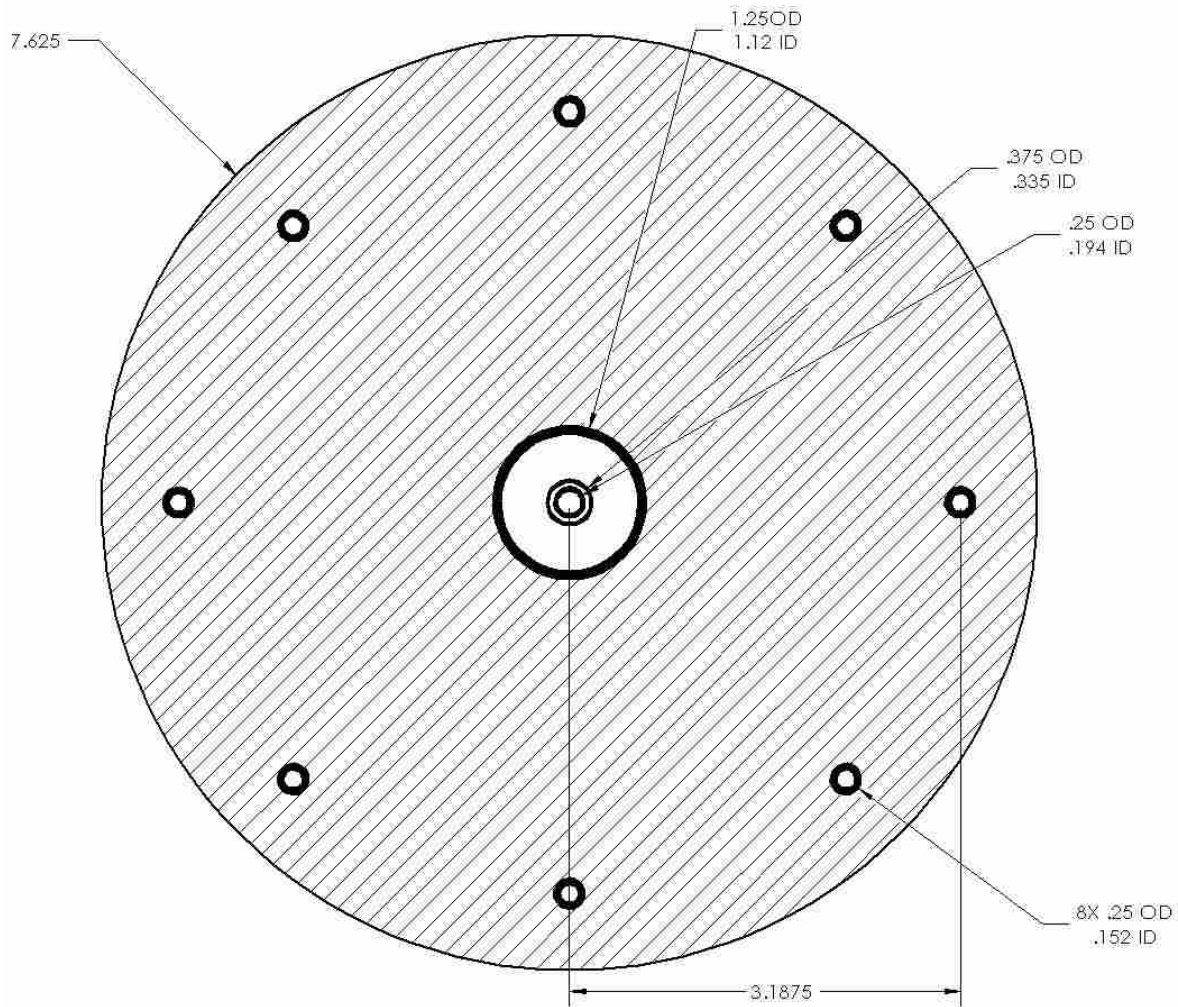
Cross-Sectional Schematic of Burner with Dimensions.
